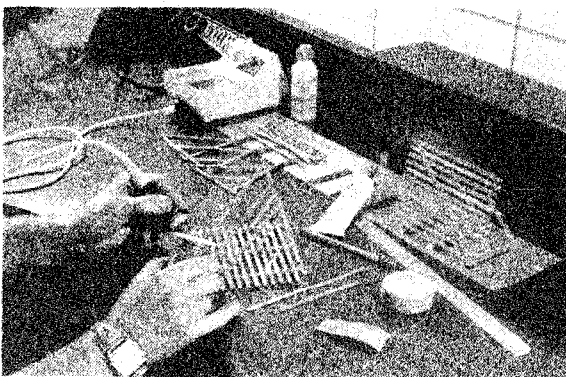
Printed circuit board is easily cut and soldered to form models of prototypes built from lumber.
